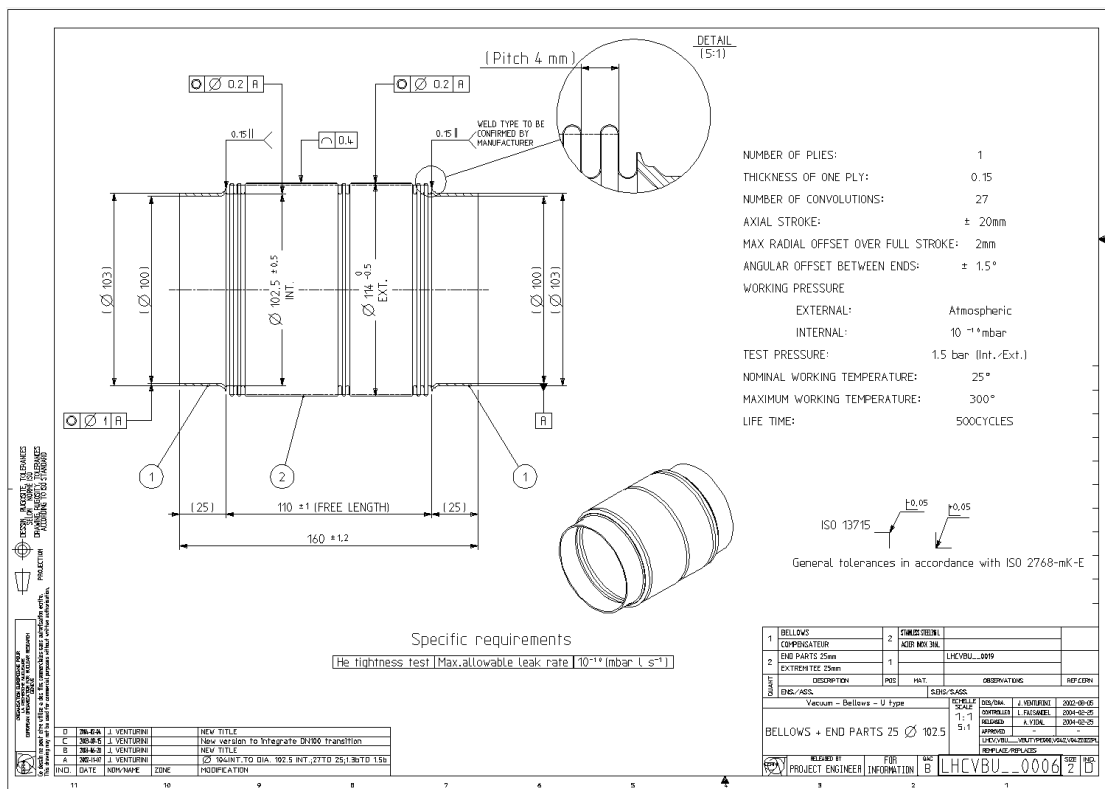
Vacuum Bellow drawing with its mechanical tolerances
